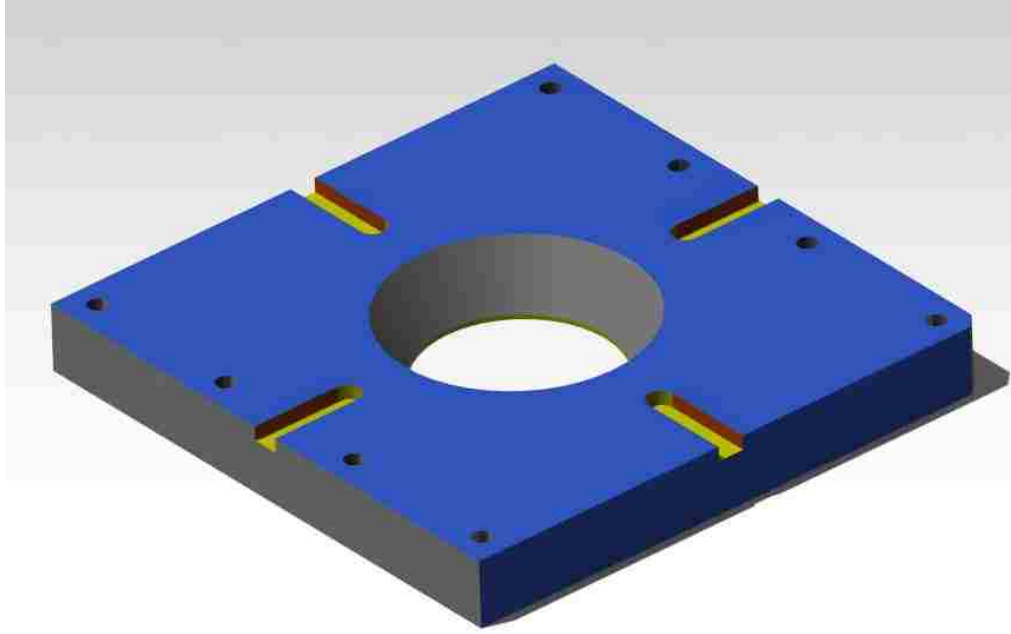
Clamping ring with 12 bolt holes and 2 locator holes (Catia model)
